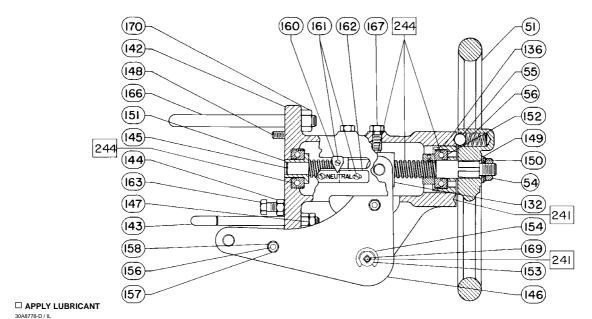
Side-Mounted Handwheel Assembly for Size 34 and 40 Actuators
